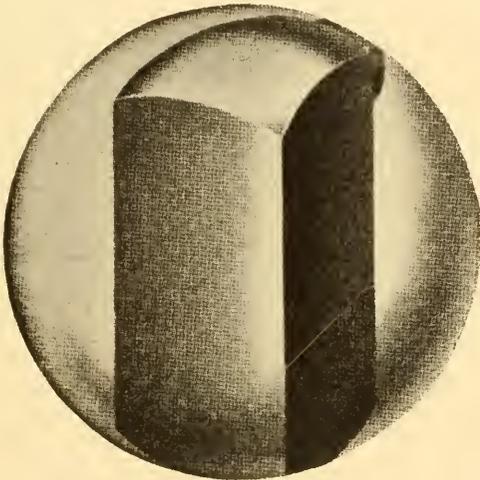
Flat Sided Balls Used in the Woods Center Bearings.
